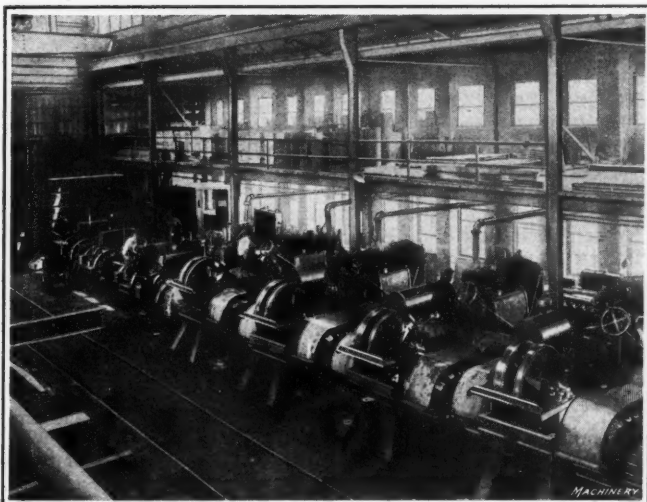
Holt Caterpillar Tractors undergoing Shop Test on Blocks
